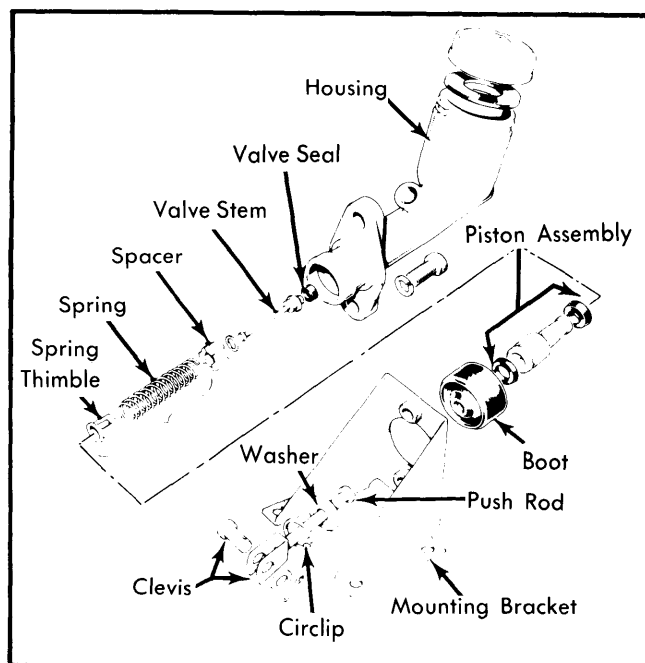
Exploded View of Spitfire Clutch Master Cylinder – Note How Master Cylinder is Mounted
